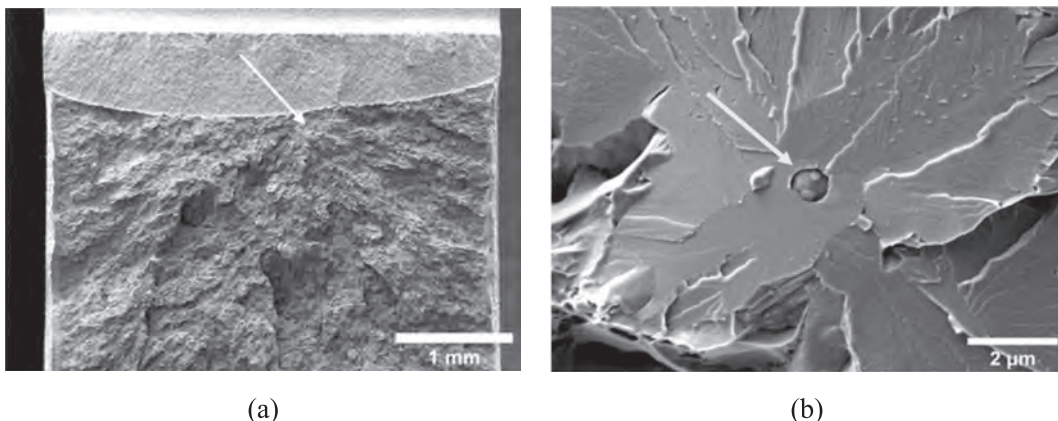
A) fracture surface and b) nucleating particle of the circumferentially orientated beltline weld miniature c(t) specimen.
